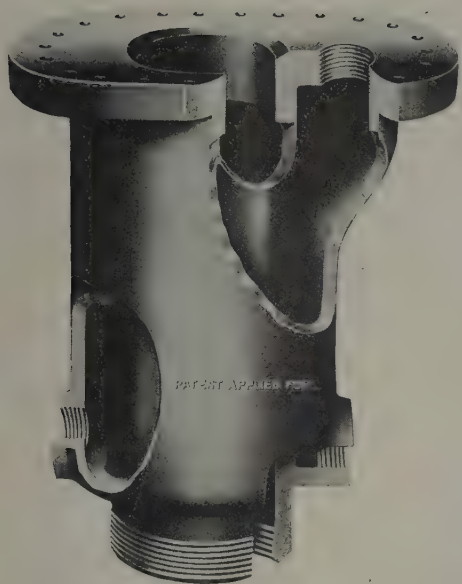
Steam Jacketed 6 in. Outlet Valve for Tank Cars. American Car & Foundry Company.
